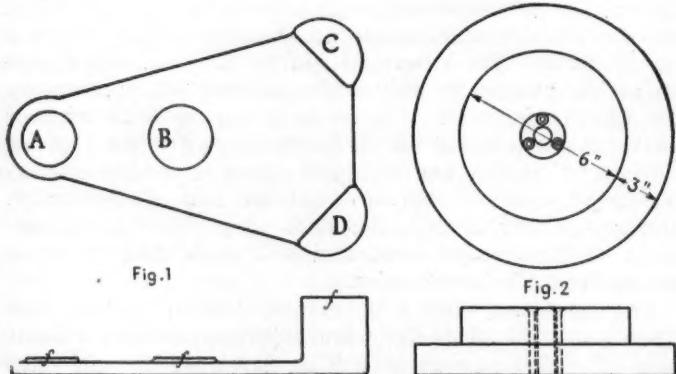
Light gray iron casting which is finished at surface marked *f*, in one disc-grinding operation. Fig. 2-Line drawing of the built-up wheel which was developed for this operation
